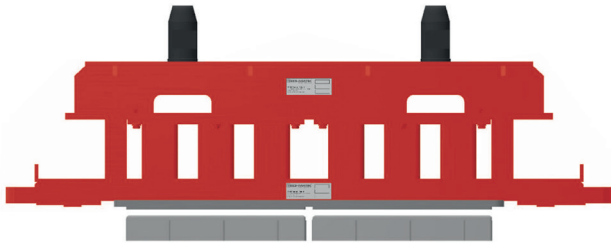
View of the lifted mold after the finished molding process with a visible produced material.
